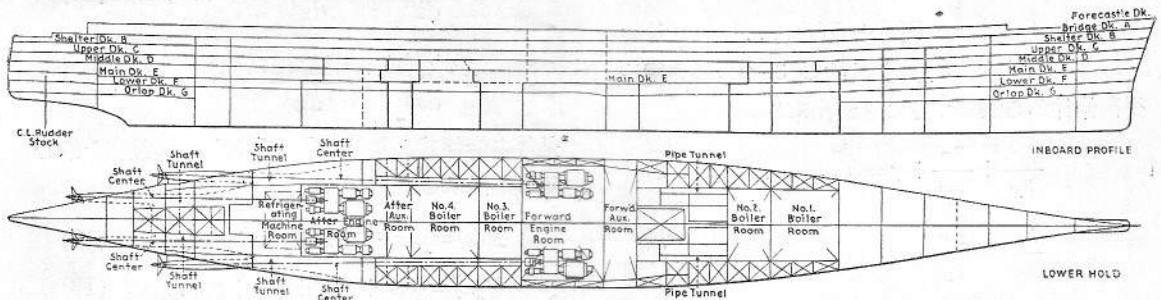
Alternative Machinery Arrangement for a Geared-Turbine Suer-Liner.
